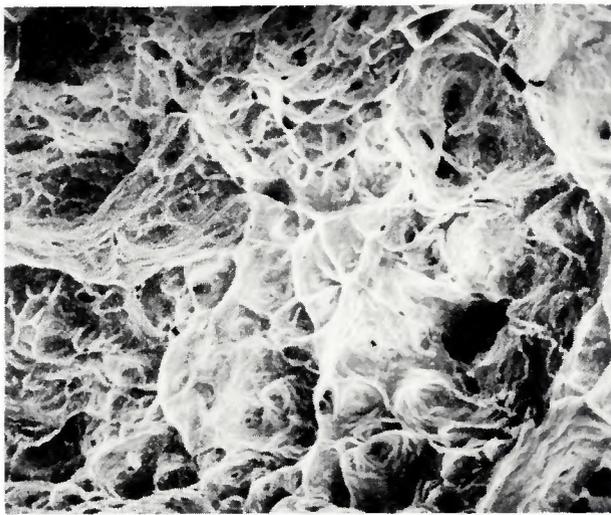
Scanning electron micrograph of a fractured weld metal tensile coupon, X300, reduced 8%
